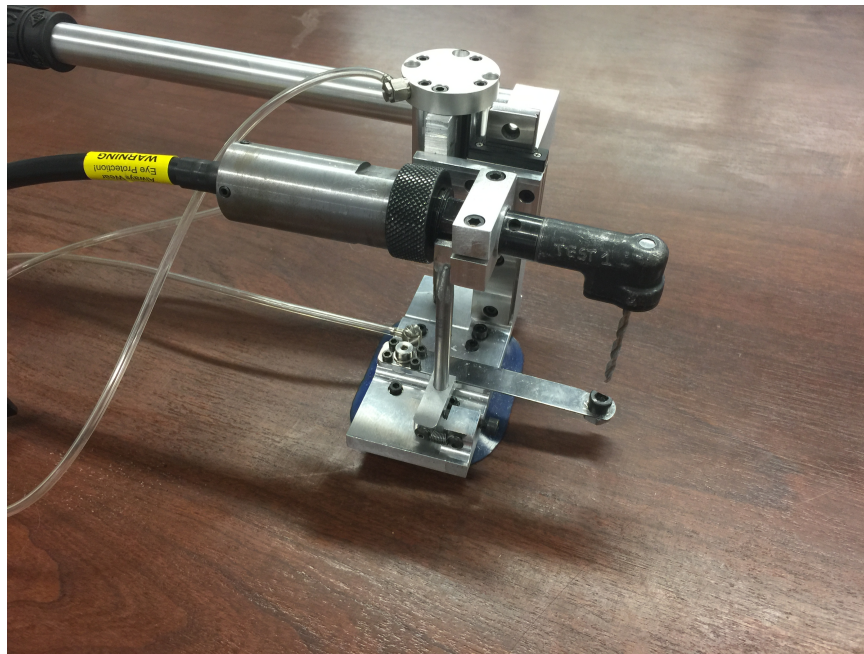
The completed prototype for the manually operated pneumatic tool.
